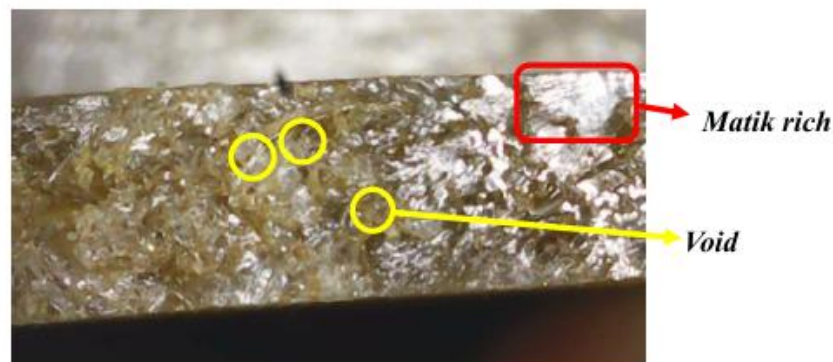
Macroscopic image of tensile fracture surface in sample E50.
